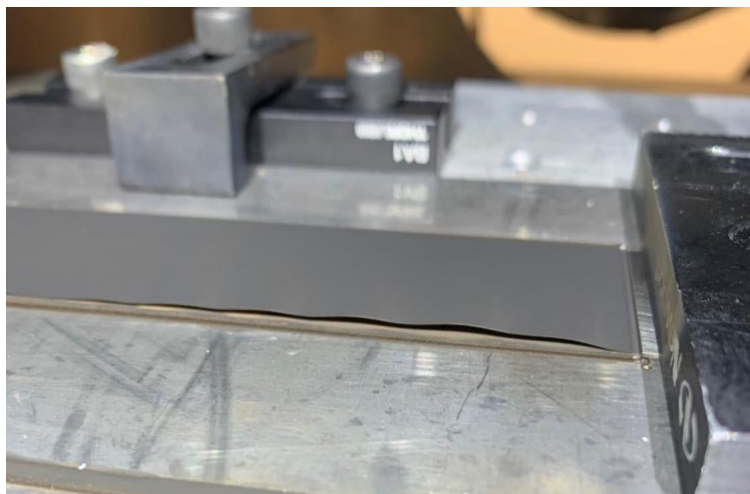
Guide Vane Test Strip After Applying FLSP with Improved Clamping
